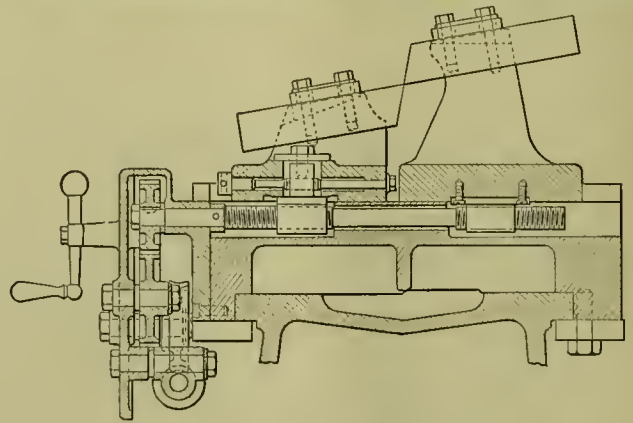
CUTTING-OFF TOOL SLIDES.
